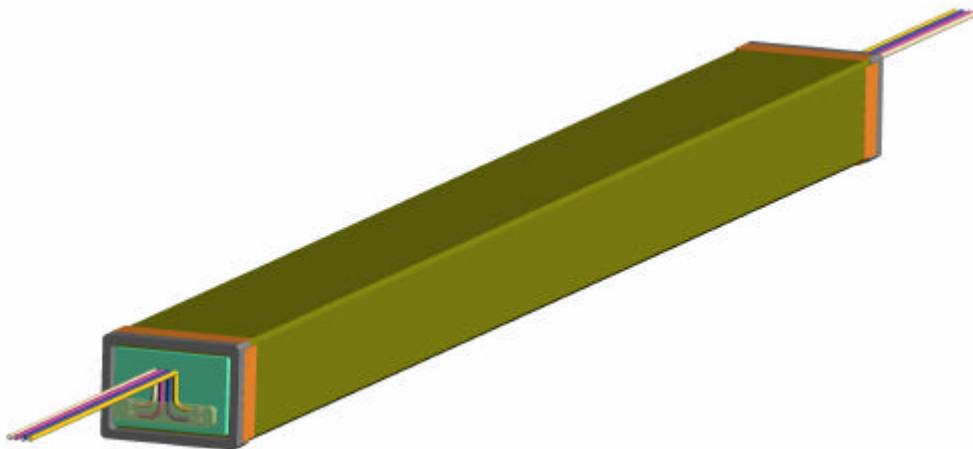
Crystal Detector Element assembly. Note that the CDE is depicted with its “top” surface – with the seam-sealing tape – down. The seal tape is therefore not shown. The CDE assembly drawing is LAT-DS-1900.
